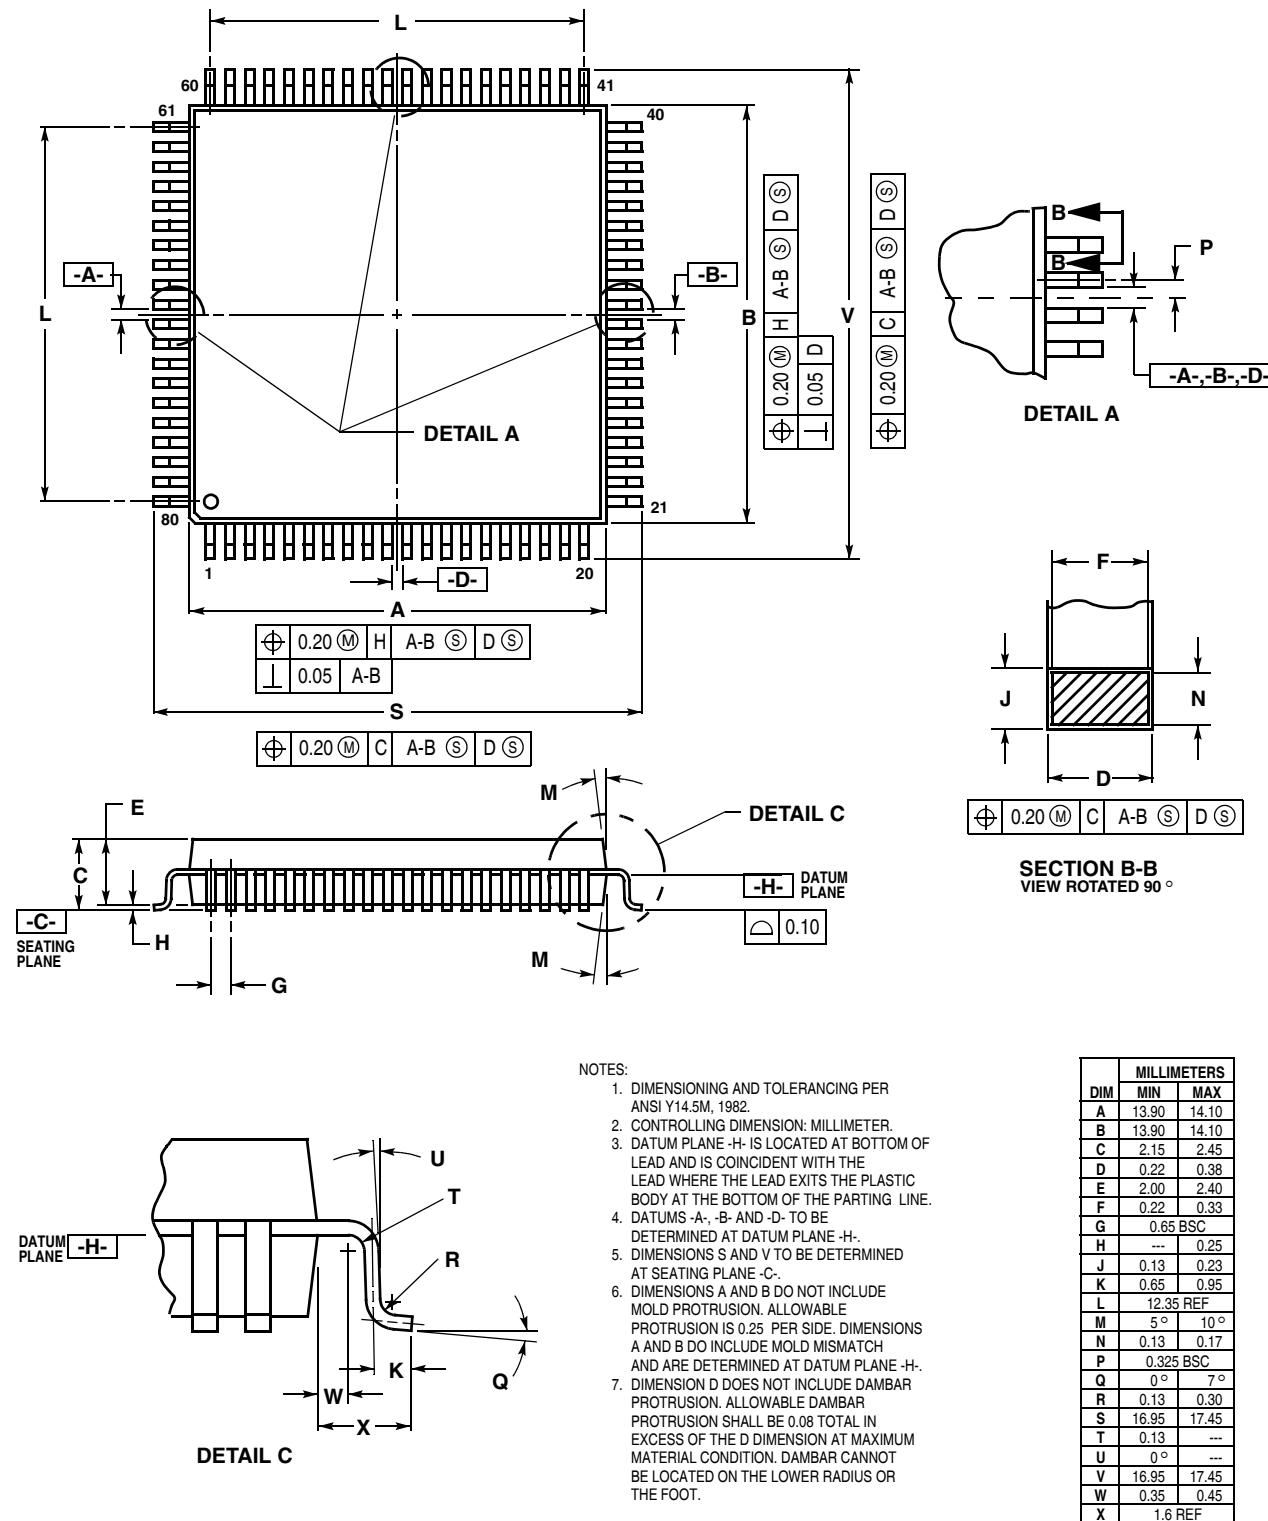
80-pin QFP Mechanical Dimensions (case no. 841B)
